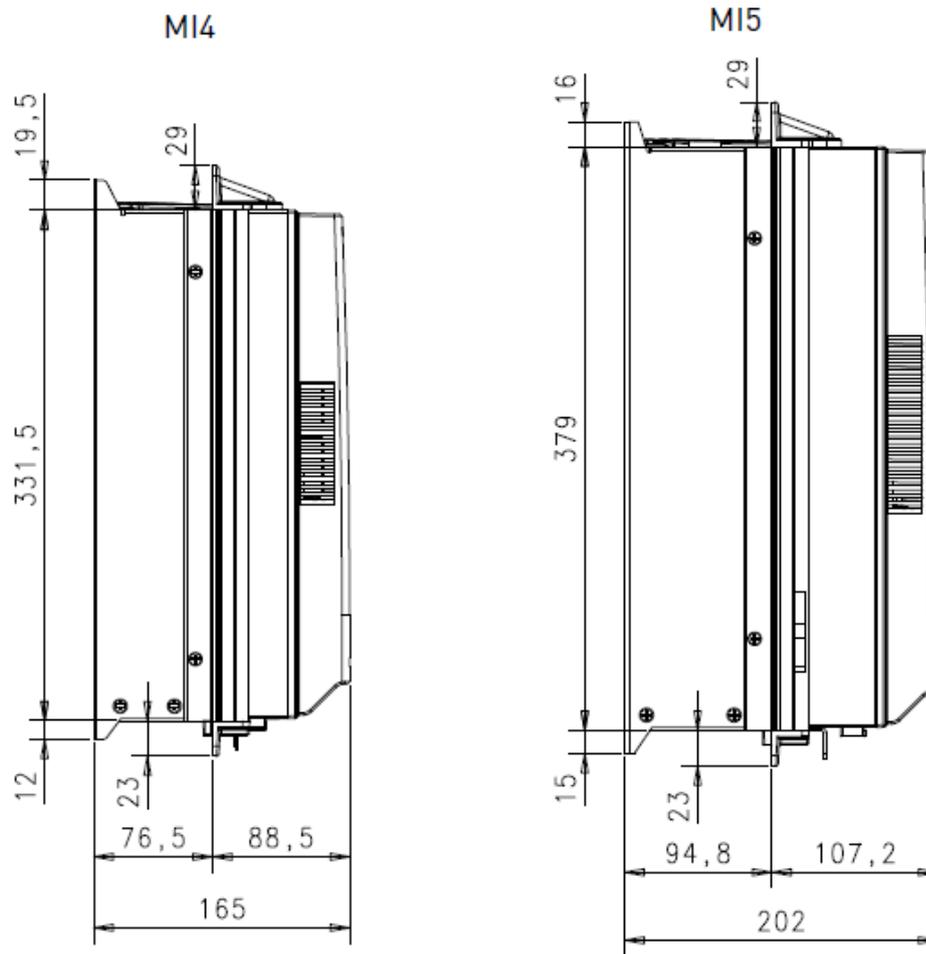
Flange mounting depth dimensions for MI4 and MI5 (Unit: mm)
